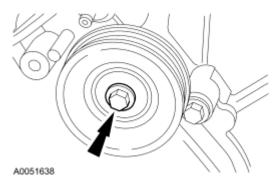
Accessory Drive Belt Idler Pulley Bolt Courtesy of FORD MOTOR CO.
